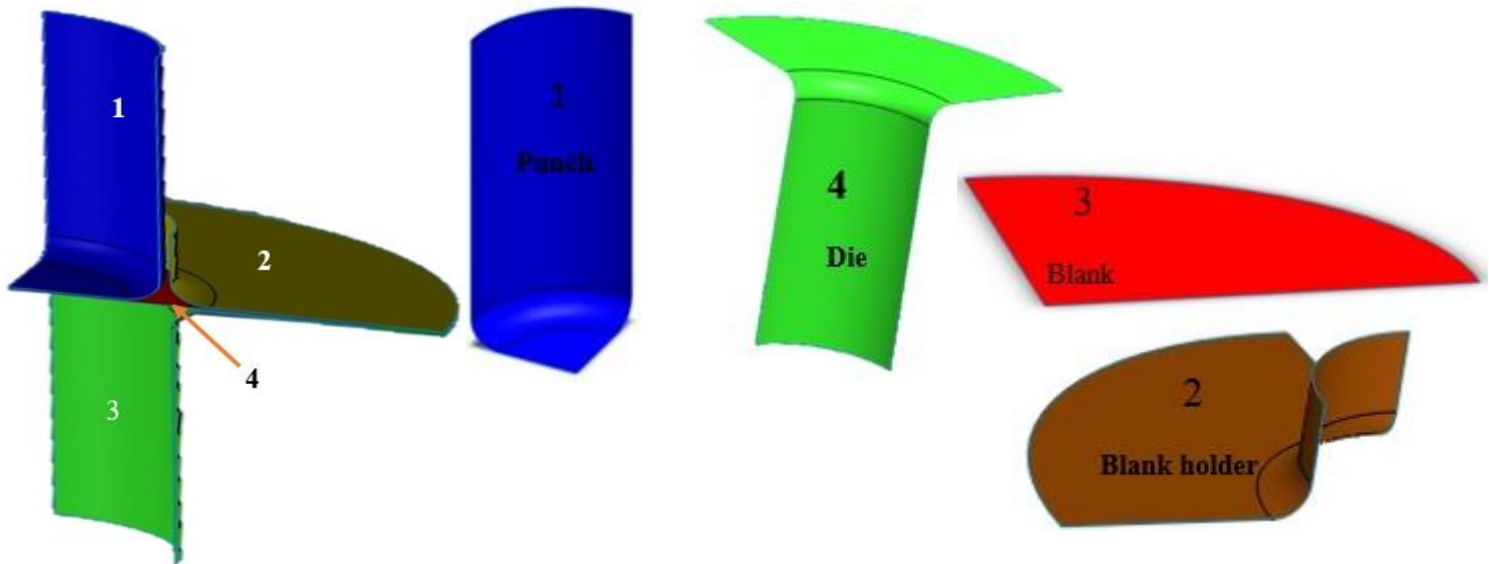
HDD tool geometry drawing by (SOLIDWORKS) program assembly.
